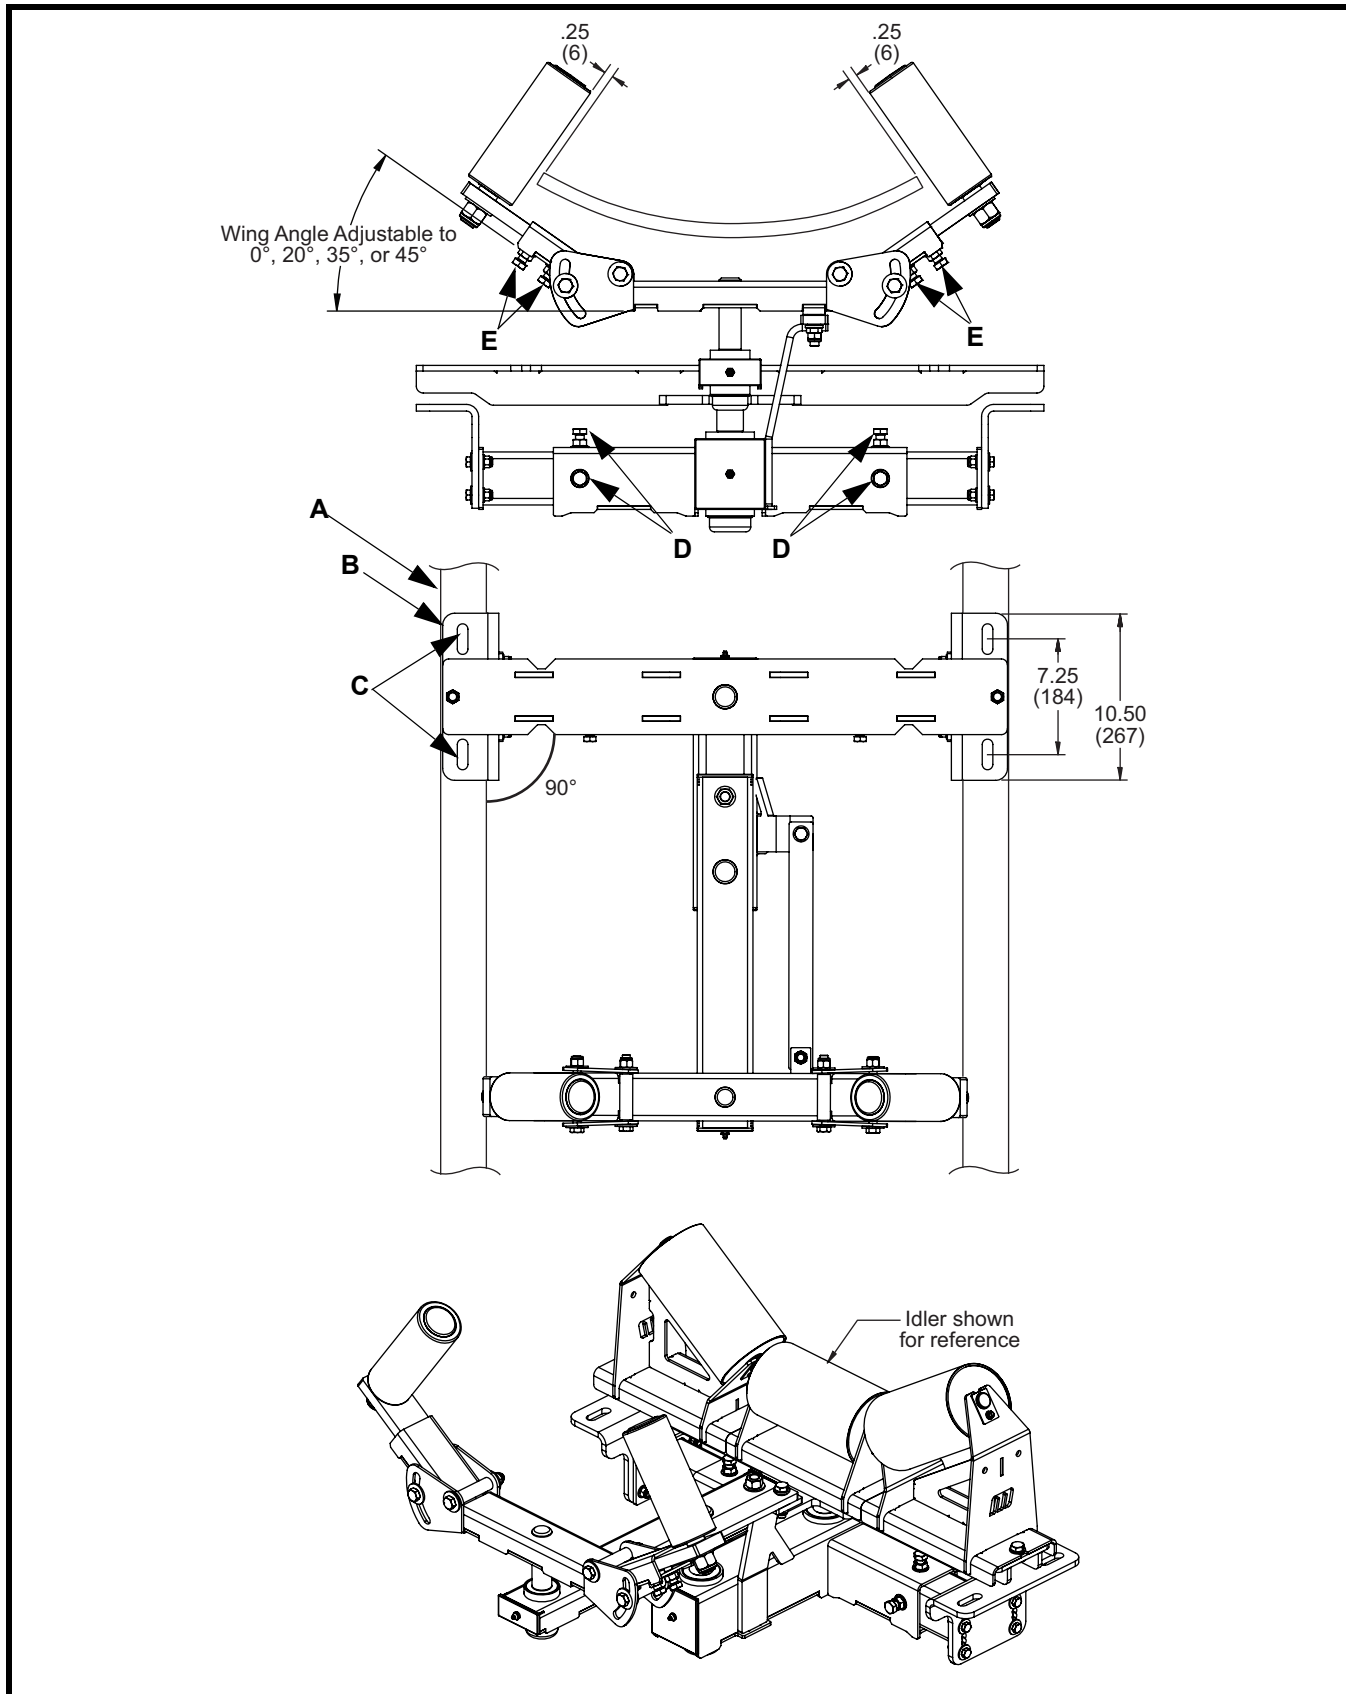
Mounting Dimensions—Martin® Tracker™ HD (Upper Unit)
